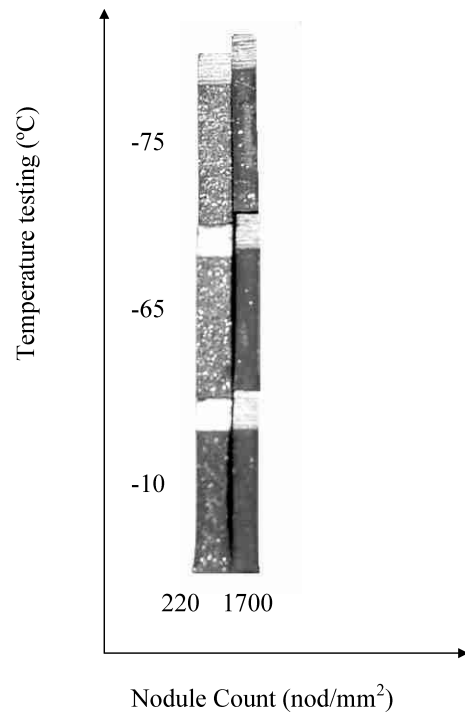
Fracture surface of impact samples of melts A and B tested at different temperatures.
